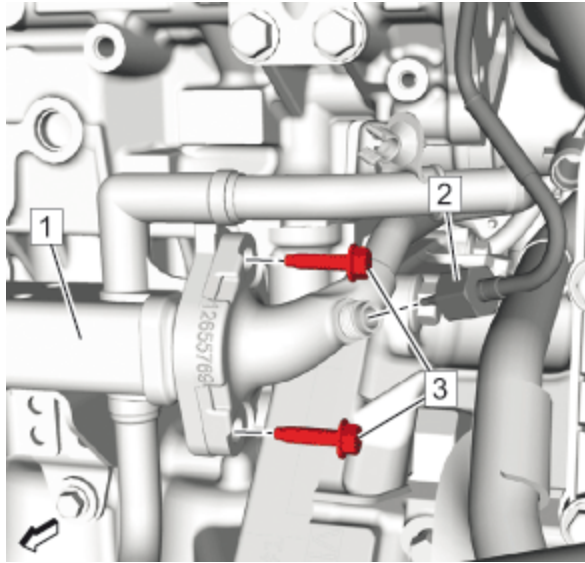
EGR Temperature Sensor - Position 2, EGR Cooler And Bolts
